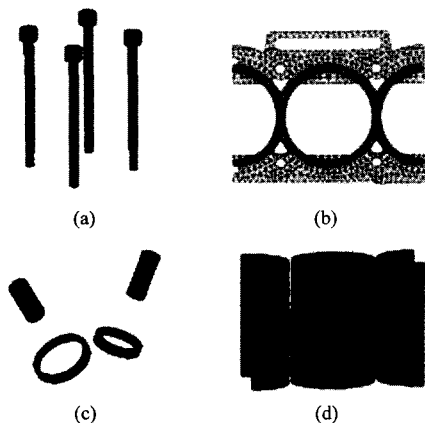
FE model of parts : (a) Head bolt, (b) Gasket, (c) Valve seat and valve guide, (d) Liner
